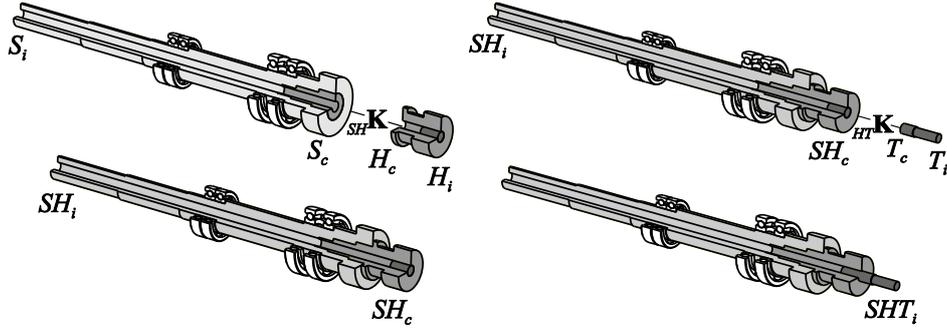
Elastic coupling of the spindle and holder (left) and elastic coupling of the spindle-holder subassembly and tool (right)
